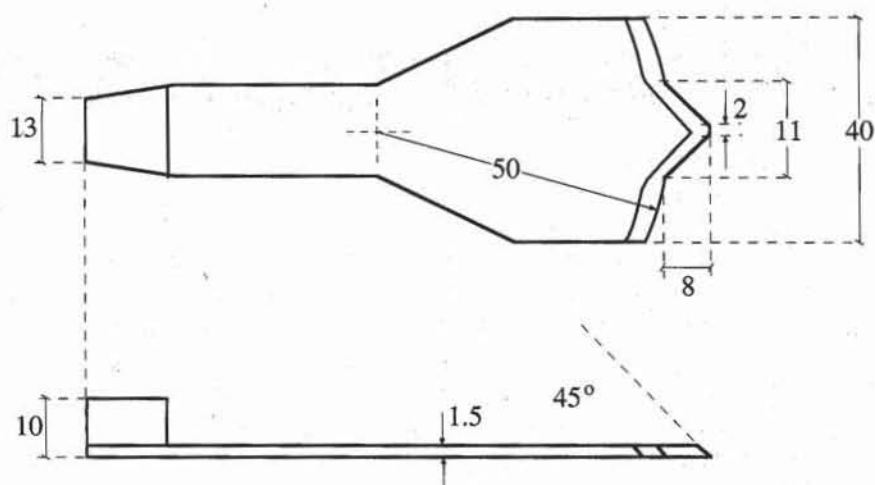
Grooving tool for Casagrande apparatus (dimensions in mm).
